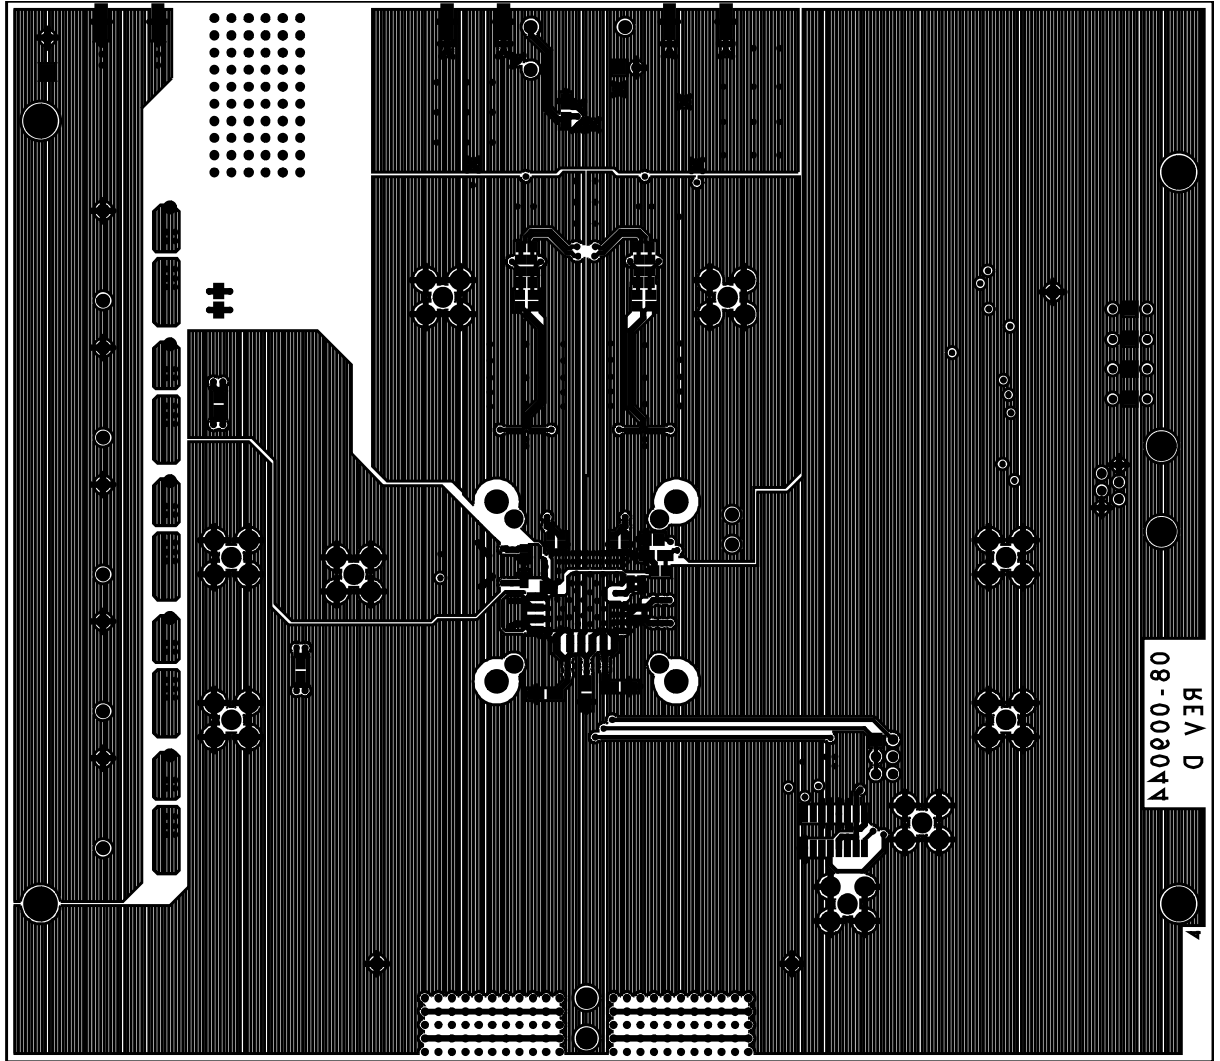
AD9779 Rev D Eval Board, Bottom Layer
